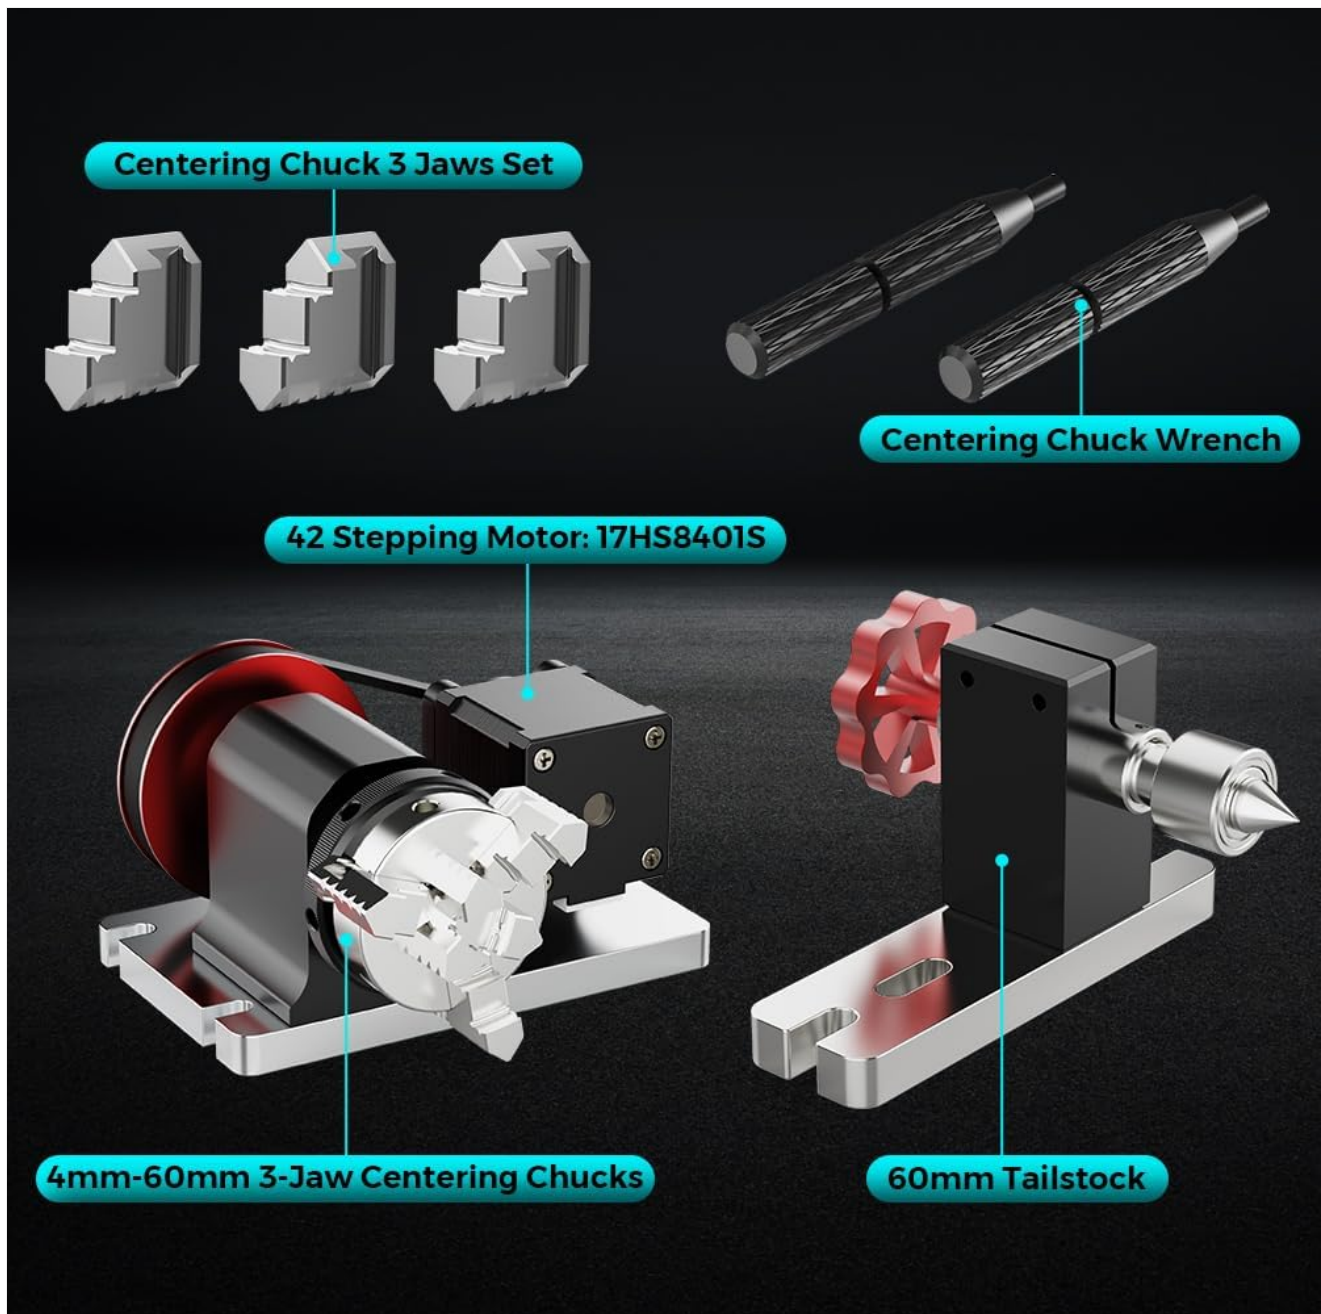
Detailed view of the 4-axis rotary module components, including the 3-jaw centering chucks and 60mm tailstock.
